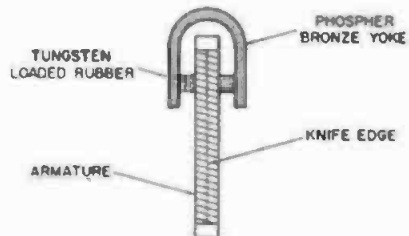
F. Top end view of the armature in an RCA recording galvanometer showing the damping assembly attached to the side of the armature.
